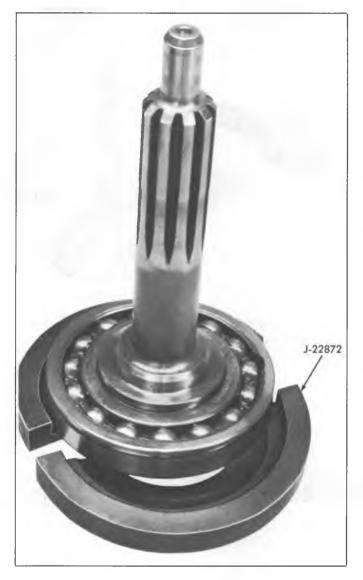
Q--Positioning Tool J-22872 to Clutch Gear
